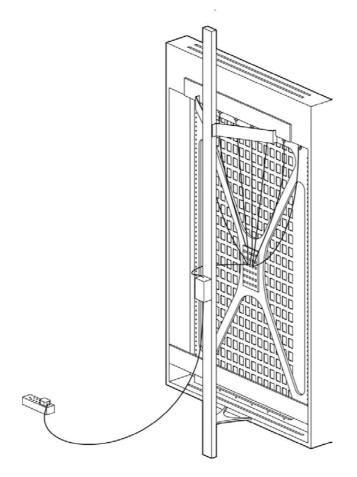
Axonometric showing one Plexiglas box mounted on the supporting rack.
